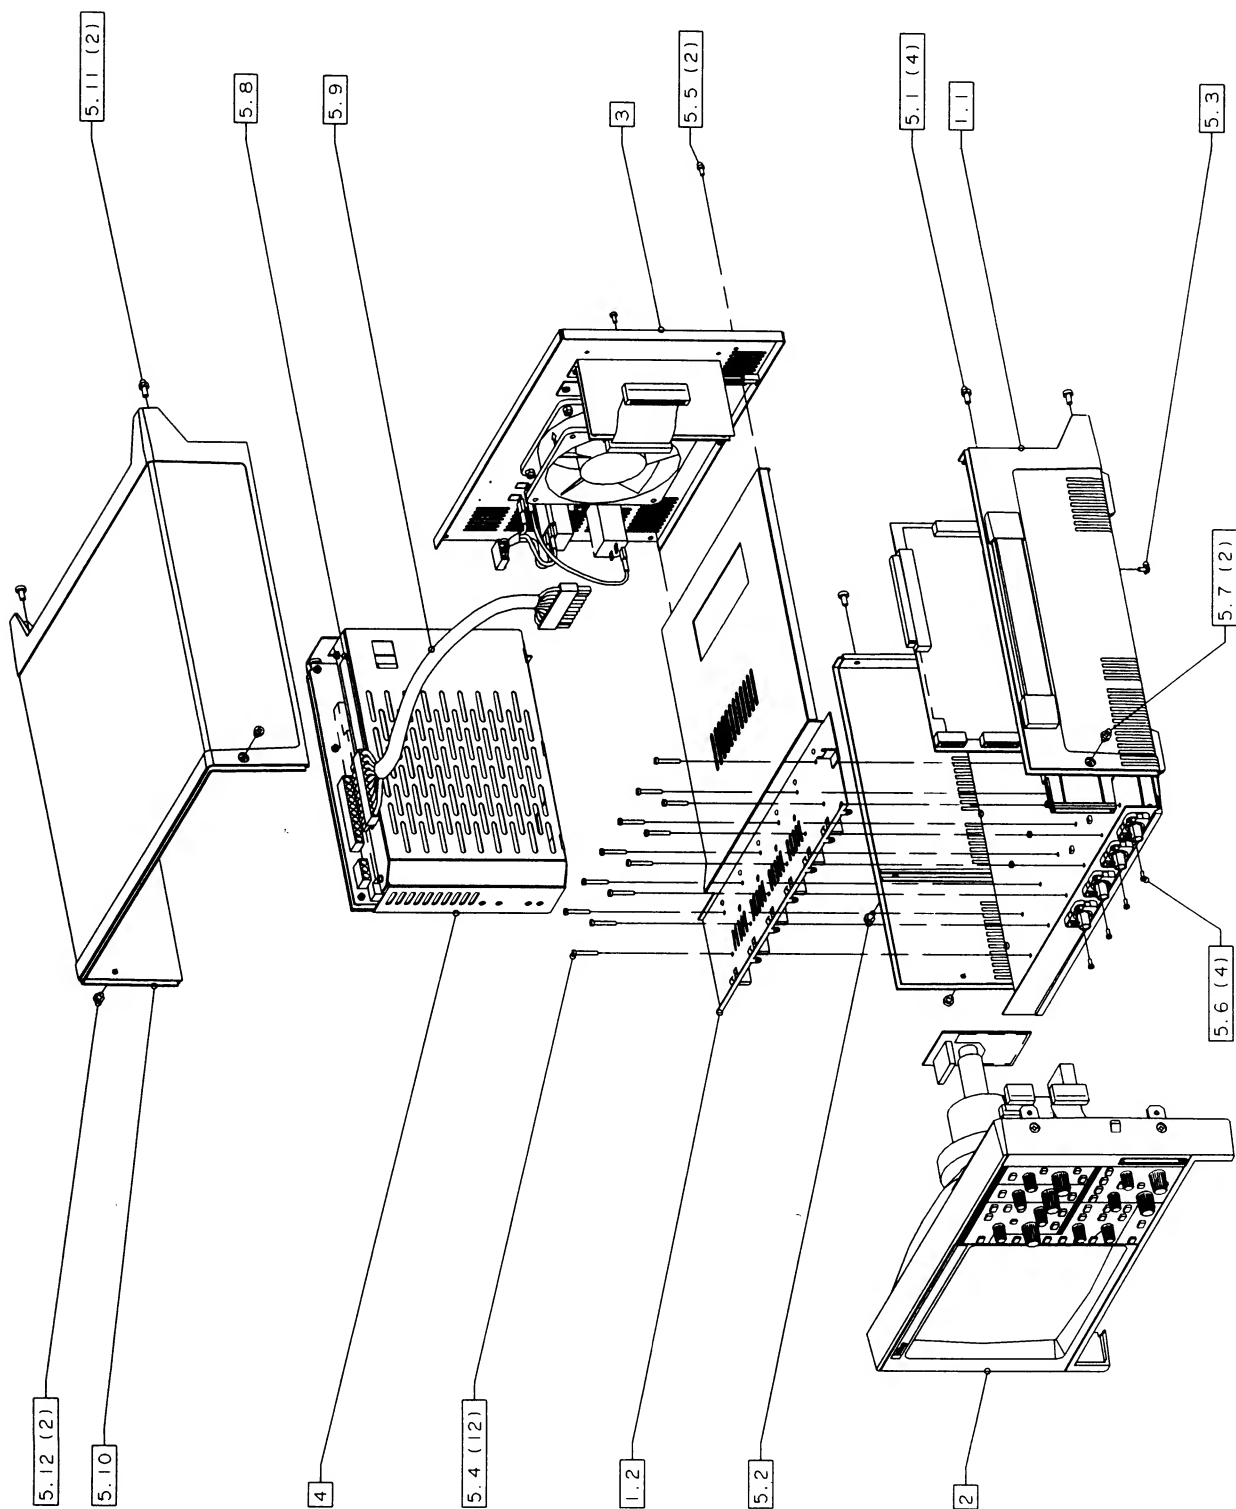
9320 DSO EXPLODED VIEW
